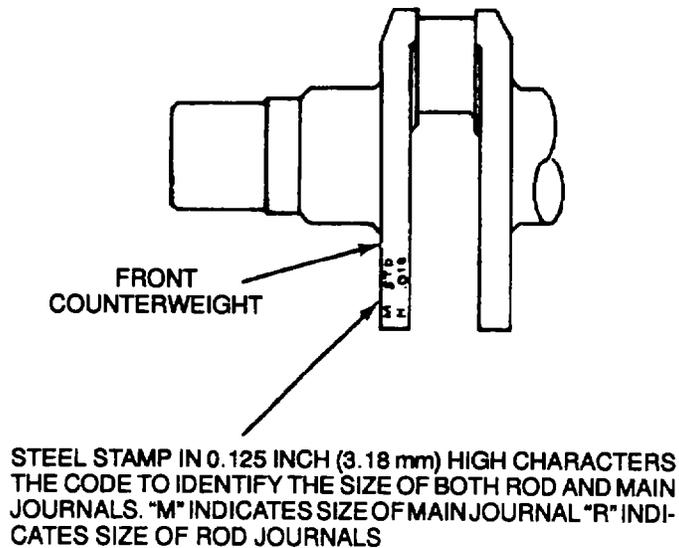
Identification of Rod and Main Bearing Journal Sizes
